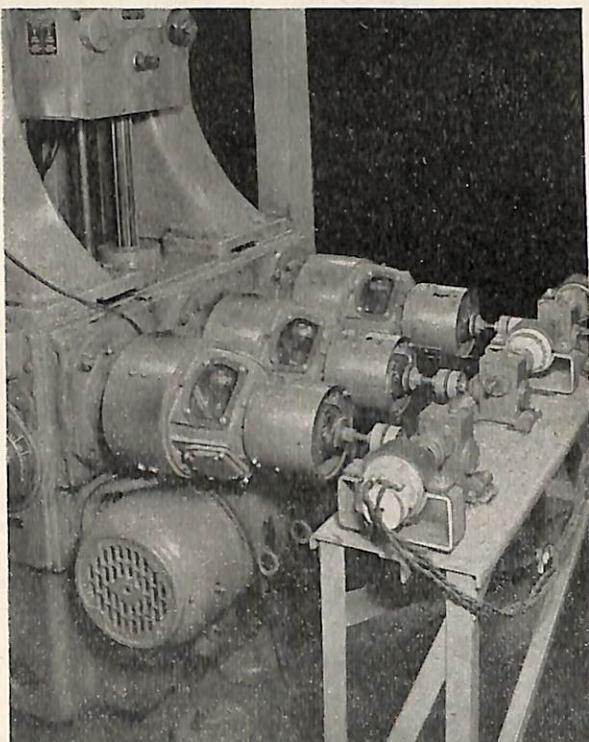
The Feed Motors, Tachometers and Selsyns with which a Milling Machine adapted to the G.E.C. System is equipped
